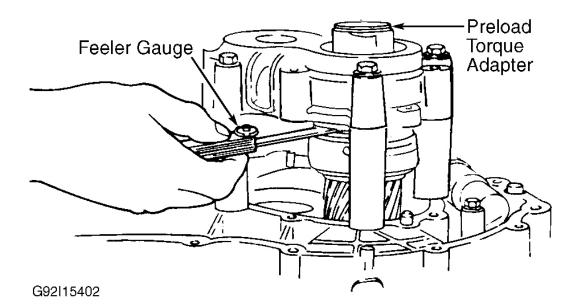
Measuring Output Gear Bearing Clearance Courtesy of FORD MOTOR CO.
